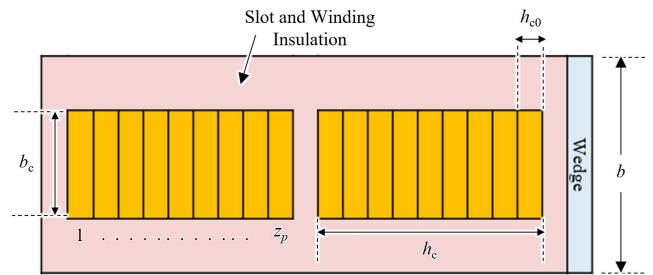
Dimension of open parallel slot with two layer form wound windings.
